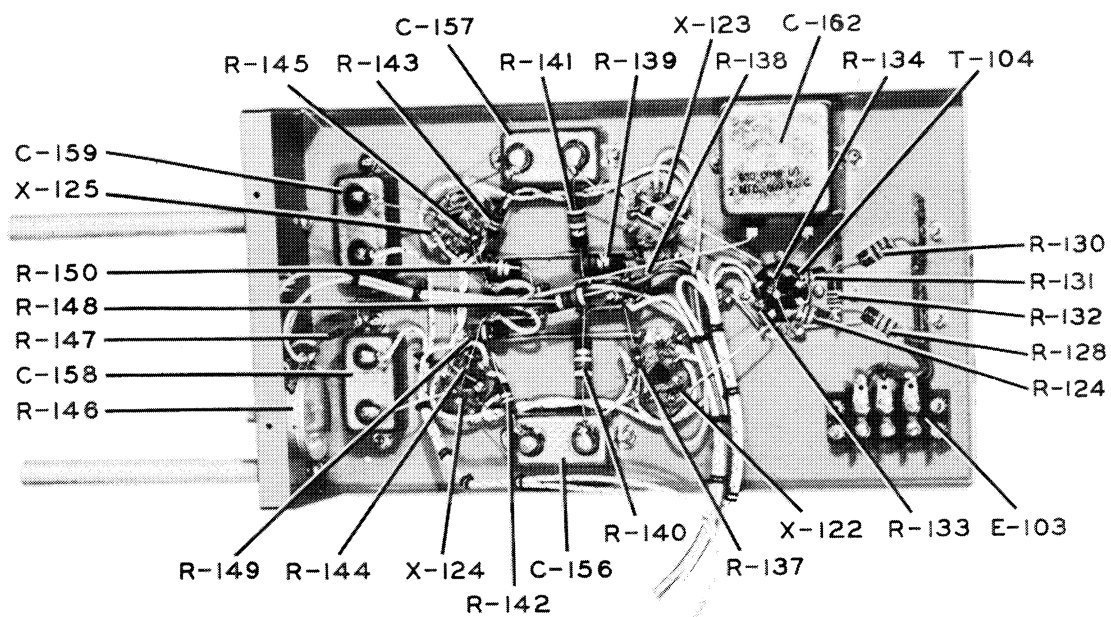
AUDIO CHASSIS PARTS ARRANGEMENT, BOTTOM VIEW
